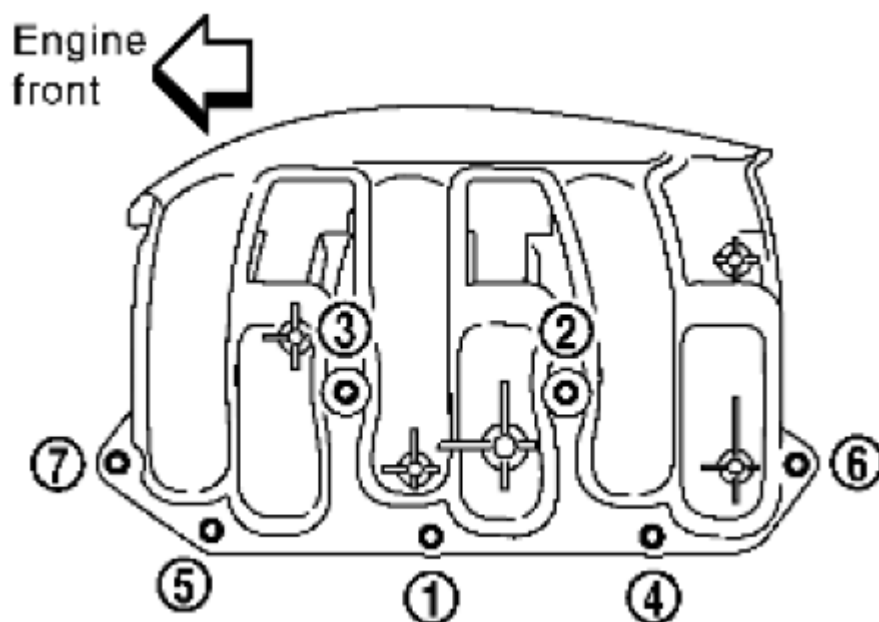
Identifying Intake Manifold Nuts And Bolts Tightening Sequence
